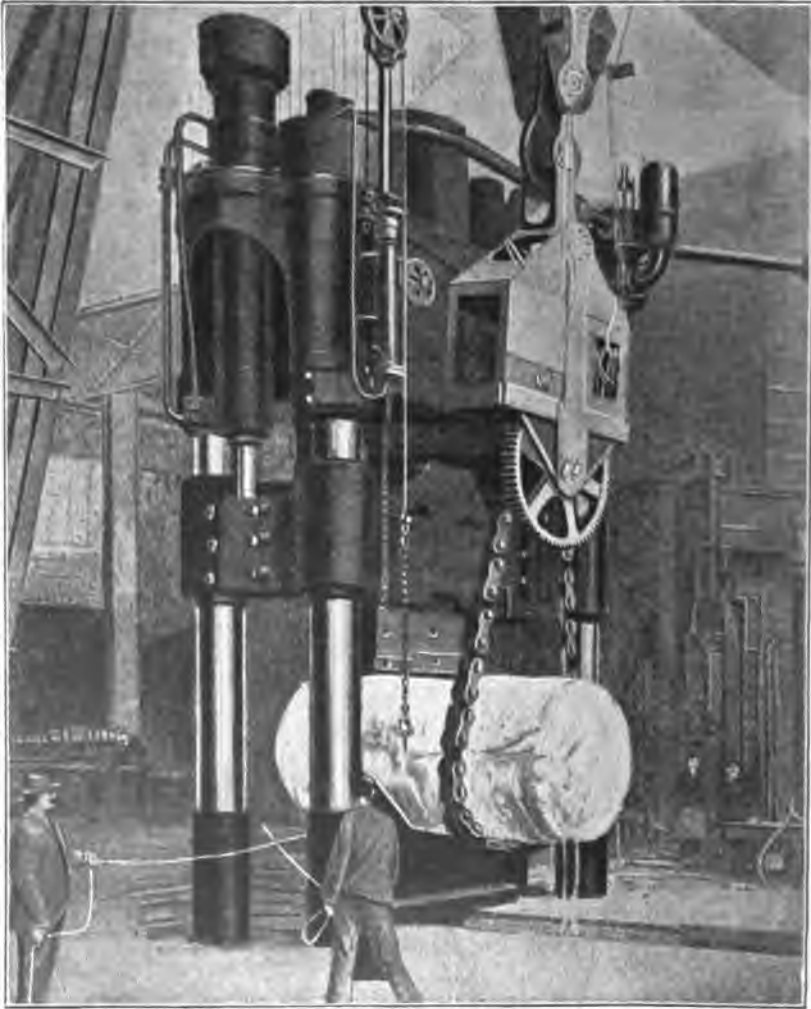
Immense Forging Press Installed in Krupp Works, Germany
